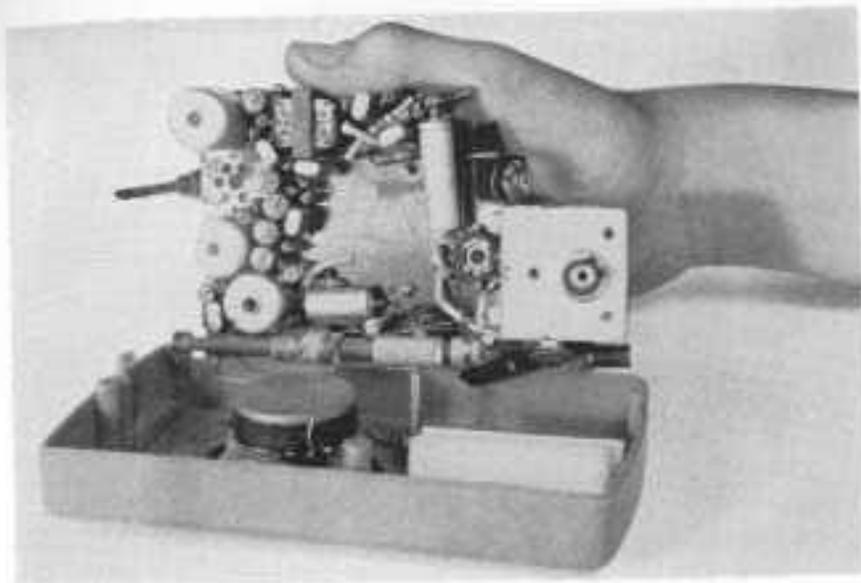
ASSEMBLY STAGES IN CONSTRUCTING THE BASIC RECEIVER. The same chassis unit is retained for later designs.
